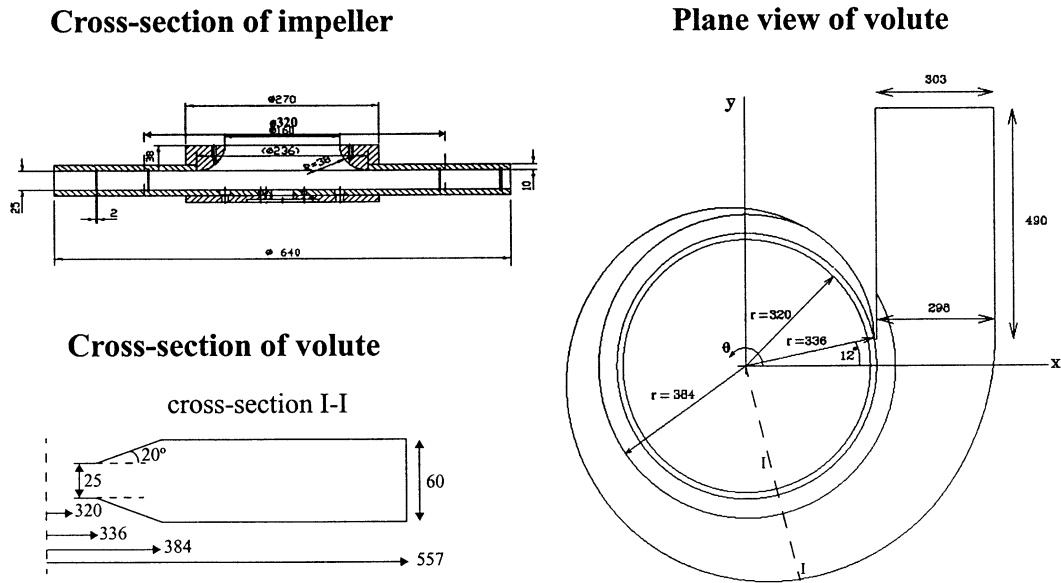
Geometry of centrifugal impeller (cross-section) and volute (plane view and cross-section). All dimensions in mm.
